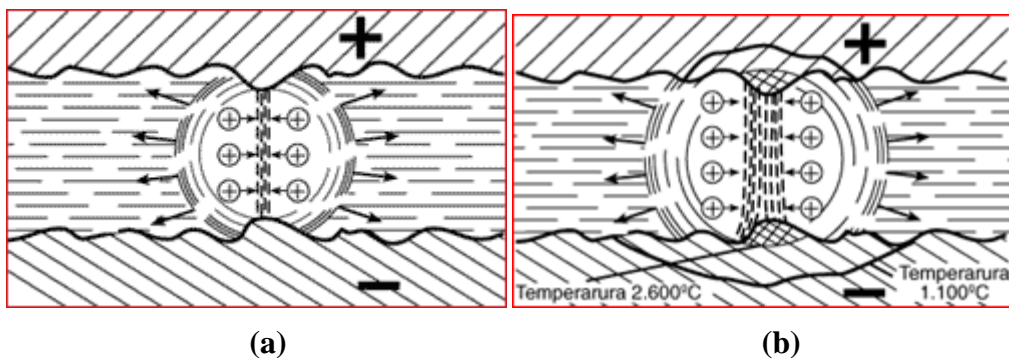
EDM machining, (JLS Machine Tool, Inc. 2005).
